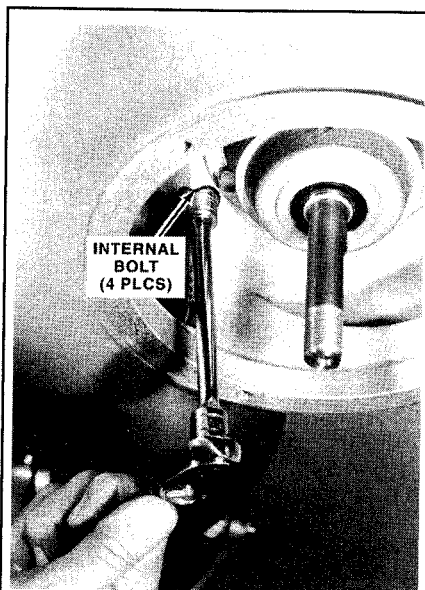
and any internal bolts (usually 4 around the outside of the impeller housing)
